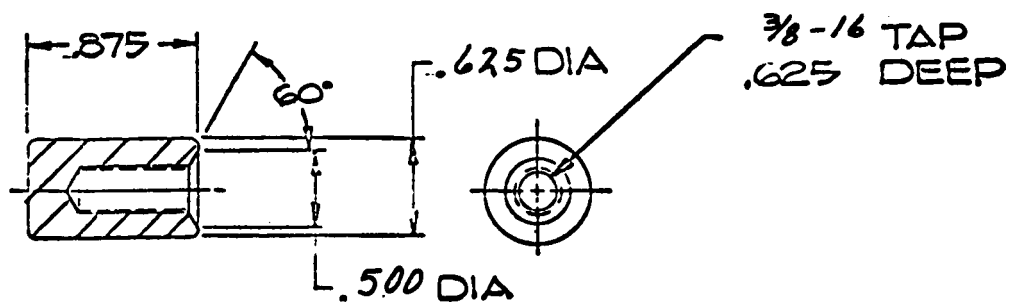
C. CROSSHEAD FOR ROUND TENSILE STRESS CORROSION ASSEMBLY
